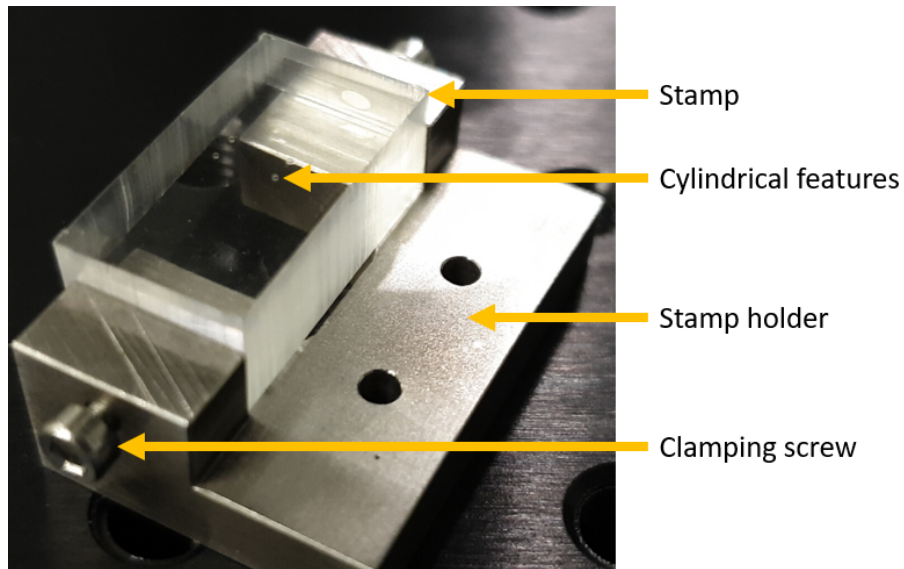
The stamp is fixed on the stamp holder by two clamping screws.
